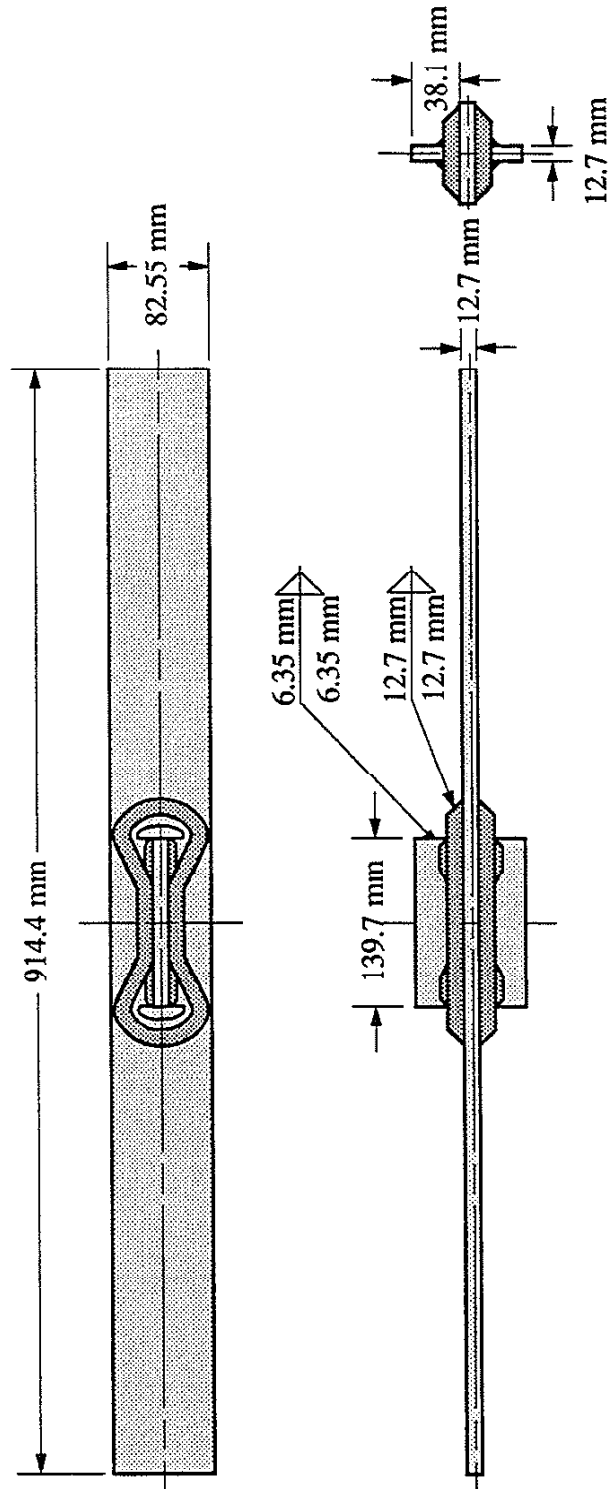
The dimensions of the longitudinal attachment with stress diffusers modeled and used in the testing program. The drawing shows welds with 12.7 mm weld leg lengths for the lower weld and 6.35 mm. leg lengths for the upper weld.
